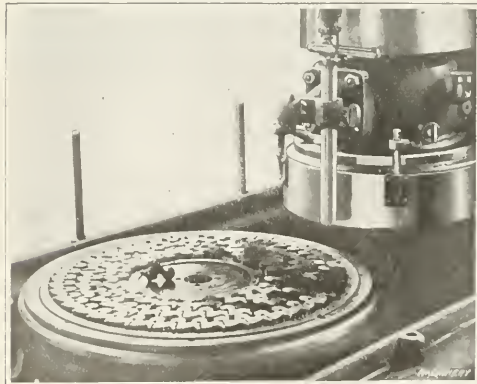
Method of holding and grinding Rifle Hammer shown at A in Fig. 18, on a Blanchard Vertical Surface Grinder
